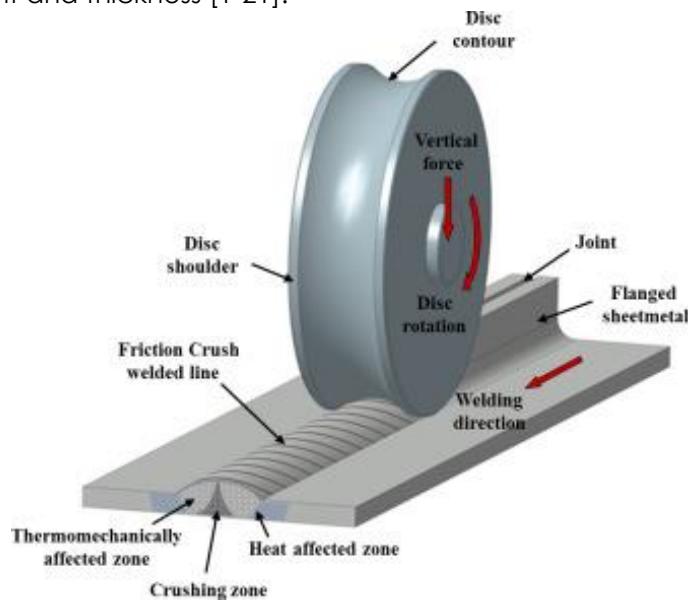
Friction crush welding process – Courtesy of [1-22]
